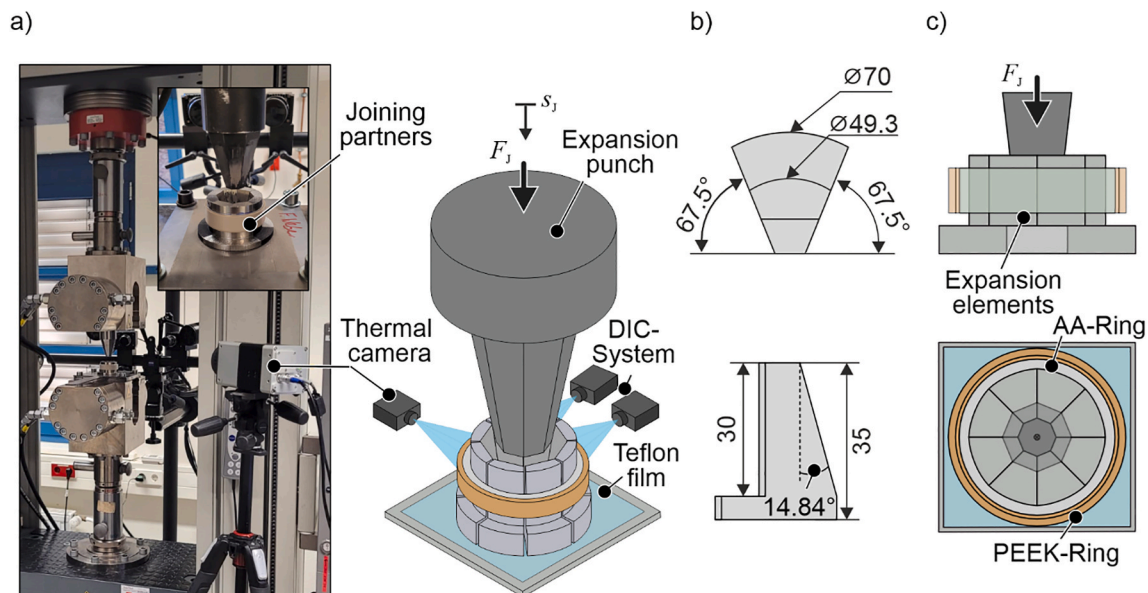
a) Joining setup, b) dimensions of the expansion dies and c) initial positioning of the tools and specimen and of the SEMT.
